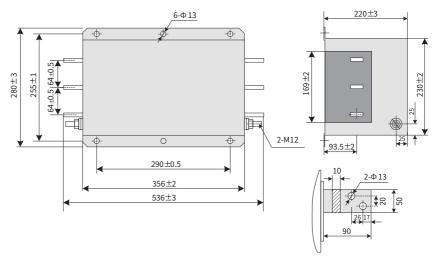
Dimensions of Jianli series 1000 A filter (unit: mm)
